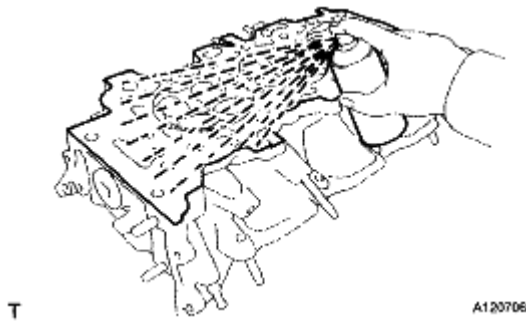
Checking Intake Ports, Exhaust Ports And Cylinder Surface For Cracks
